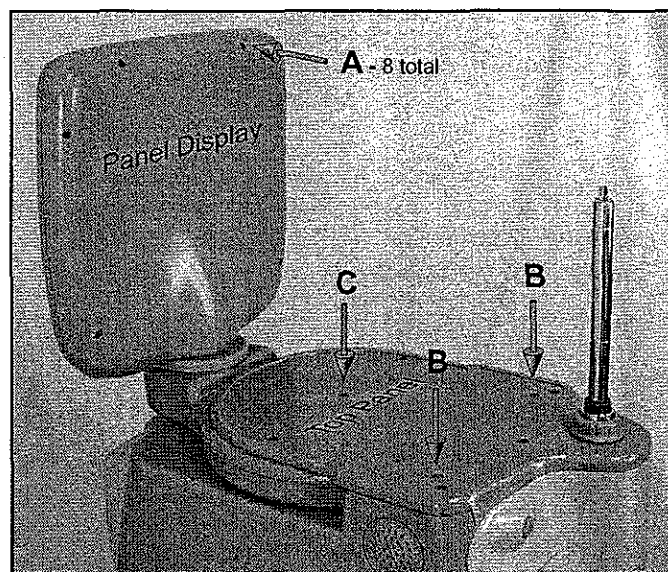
Fastener Locations for Top Panel and Panel Display (rubber mat removed from top to expose fasteners). The Top Panel must be removed before the Upper Side Panel can be removed in Figure 3-4.
